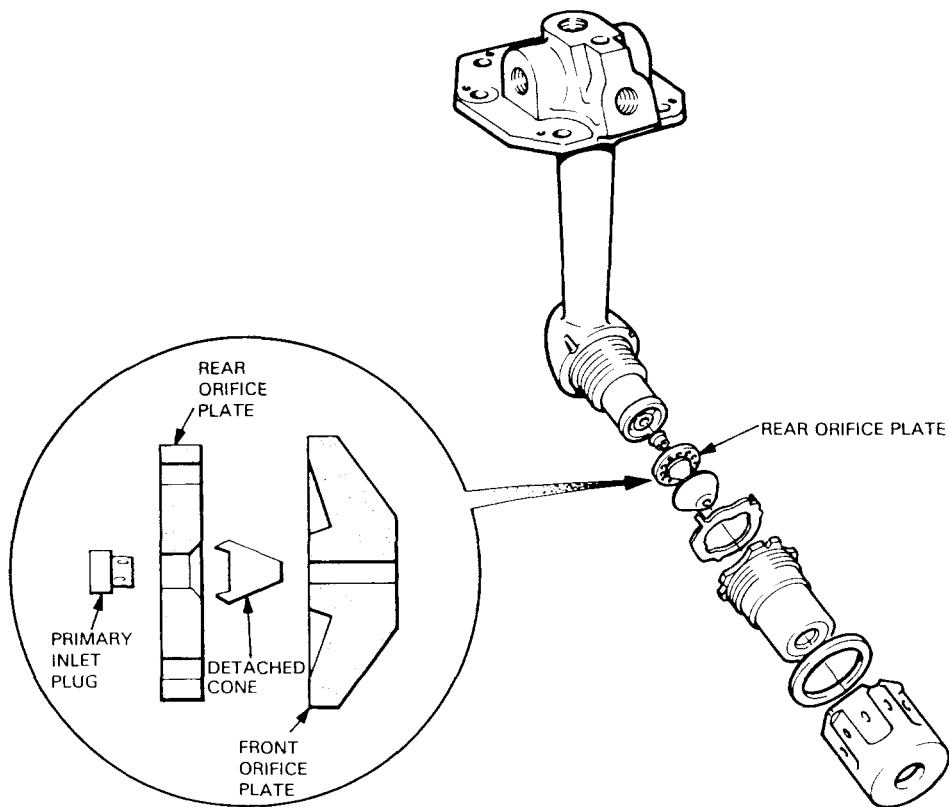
OLYMPUS BURNER: EXPLODED VIEW, WITH FAILURE MODE
